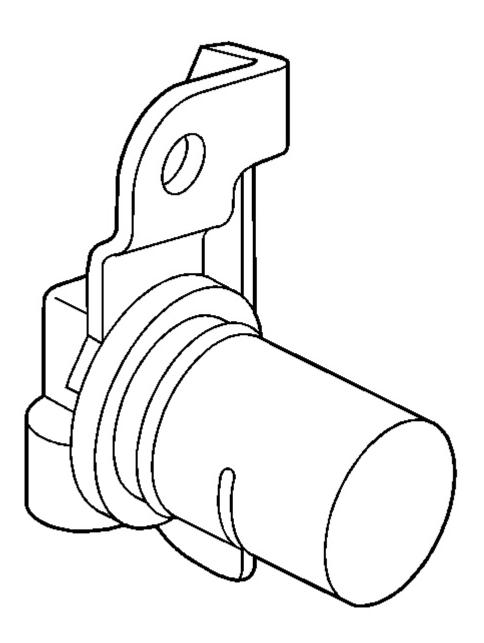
Vehicle Speed Sensor Assembly Courtesy of GENERAL MOTORS CORP.
